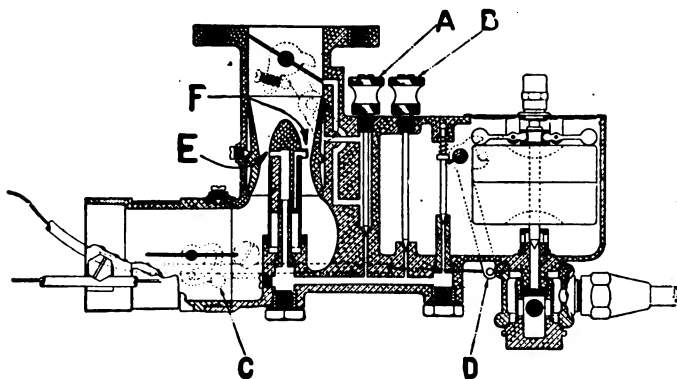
Schebler Model "A" Carburetor, a Single Tube Device
